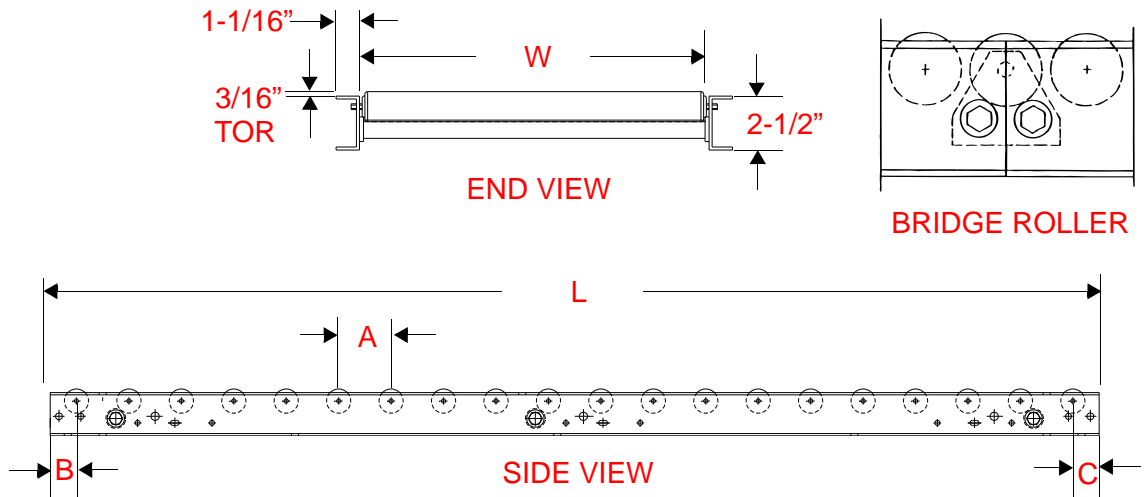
Light Duty Roller Conveyor - Straight Section
